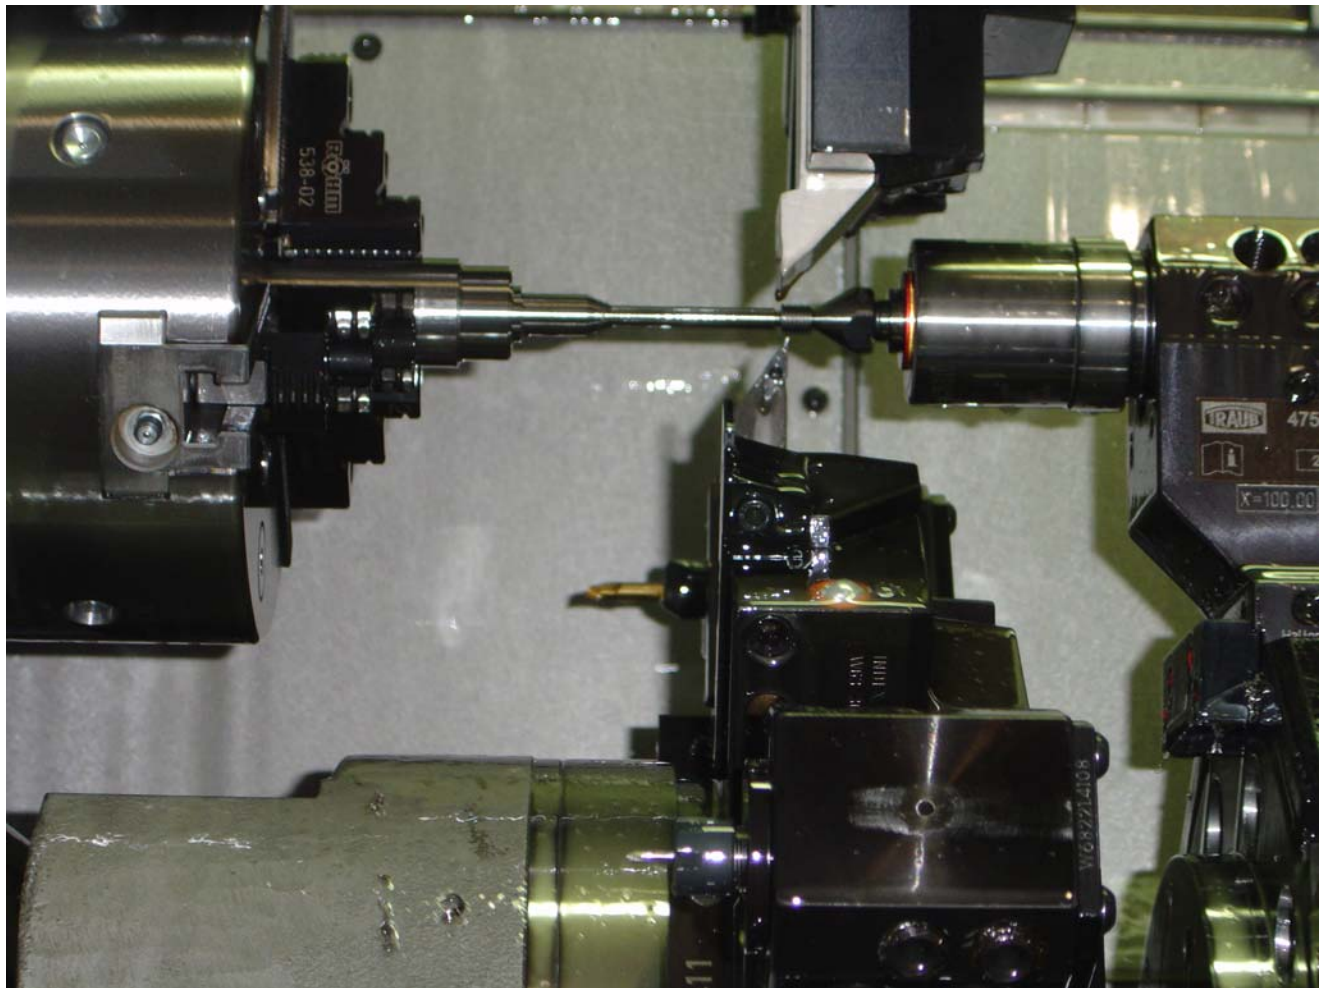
Two cutting tools engaged simultaneously with a live center on the third spindle
